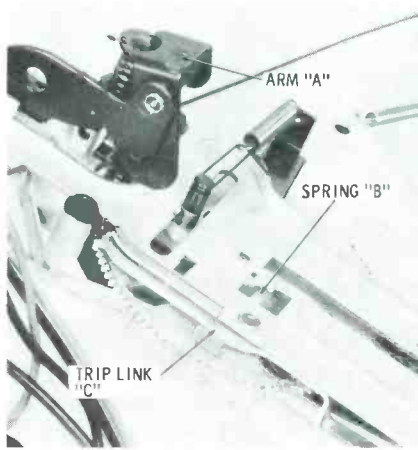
Record-dropping mechanism on V-M 1200A. Bend arm "A" to adjust.
